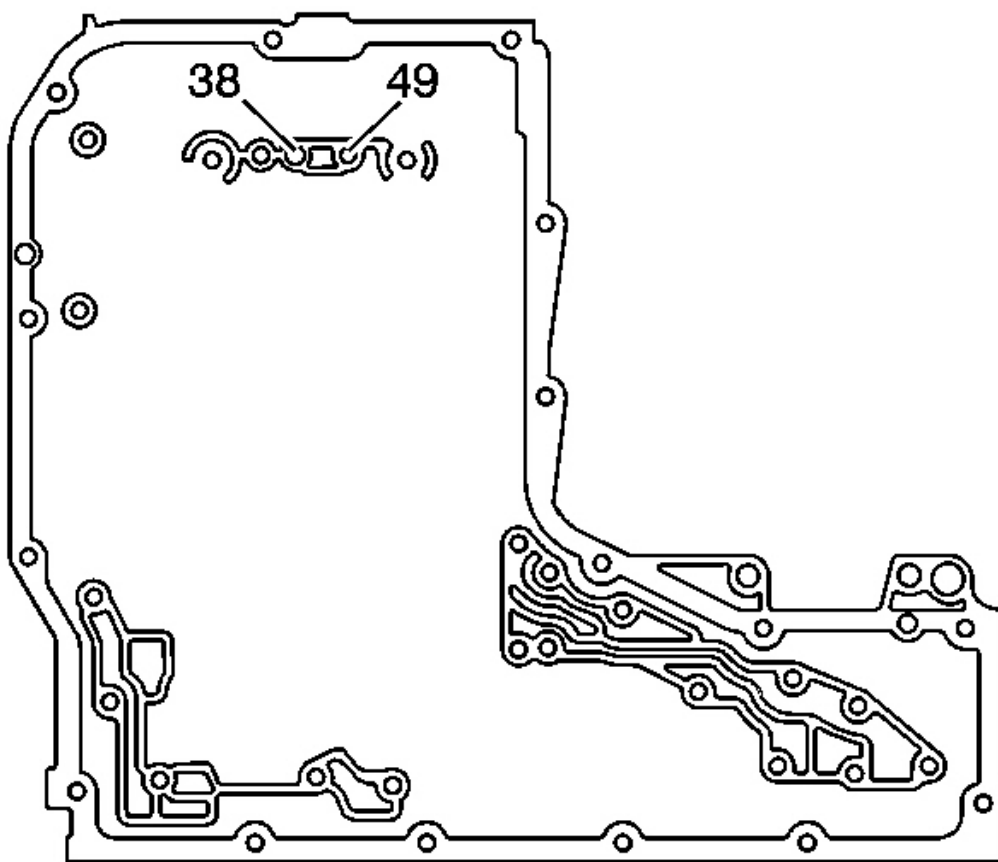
Blowing Air In Passages To Forward Clutch & Coast Clutch
